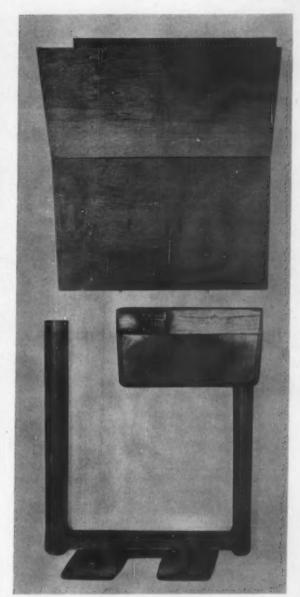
Assembled view of preformed gating and risering system used for wedge casting.
